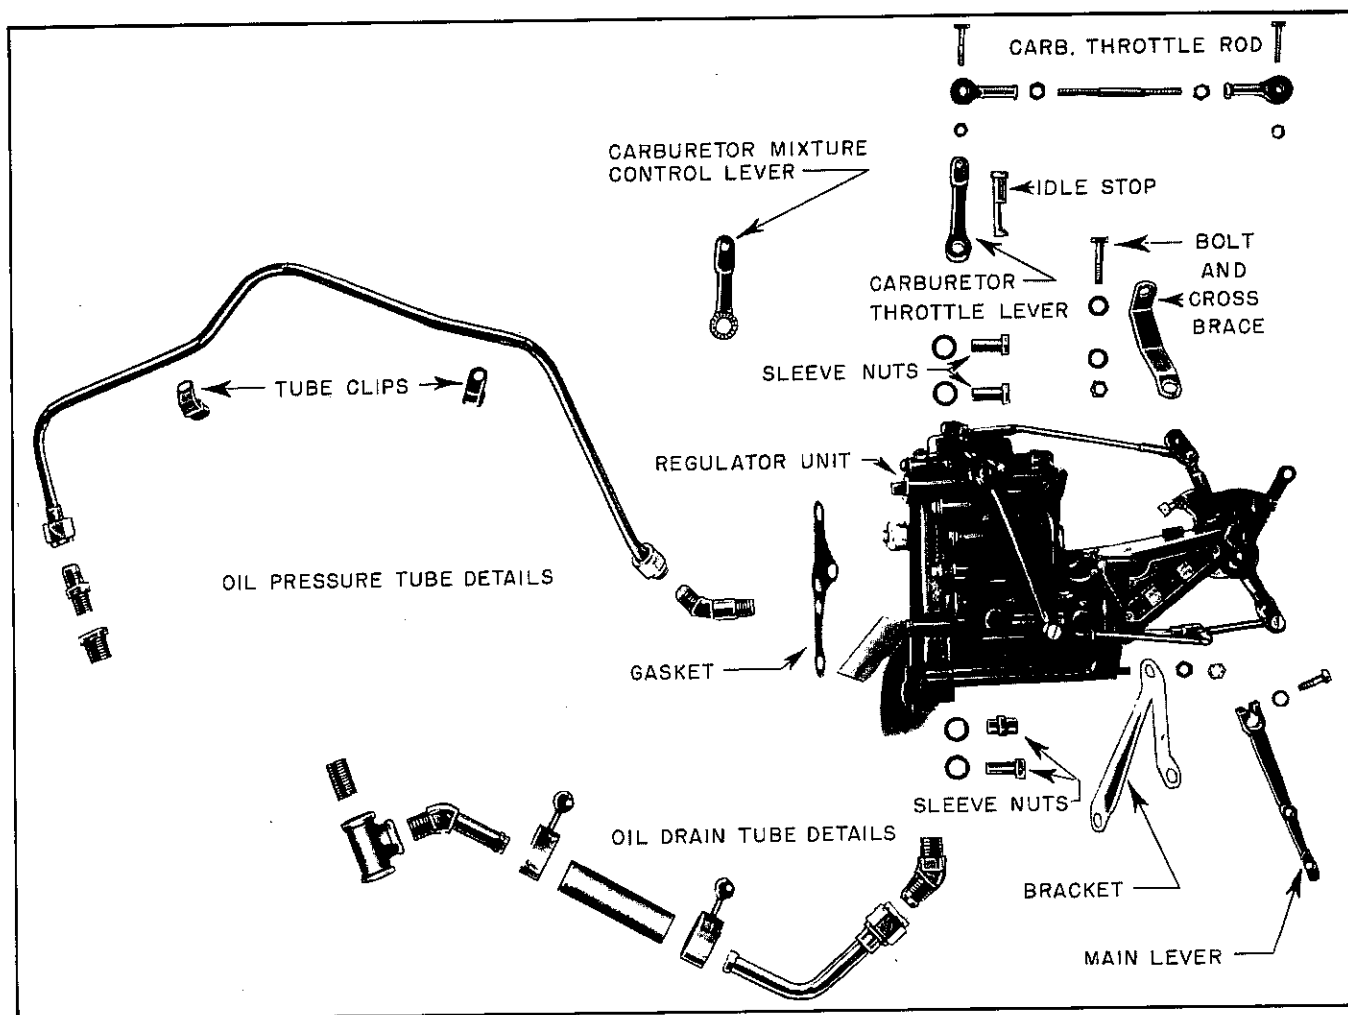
Automatic Manifold Pressure Regulator Showing Type II Installation Detail Parts.
